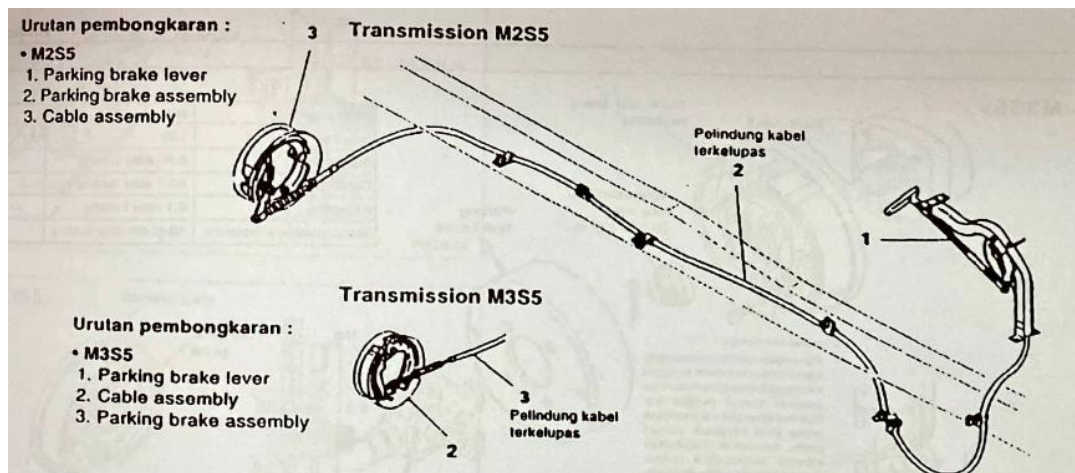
Typical mechanism and schematic control of the parking brake installed in the LST
